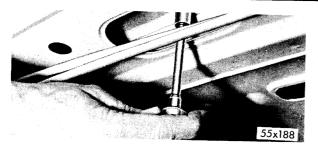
Removing or Installing Belt Moulding Attaching Nuts
